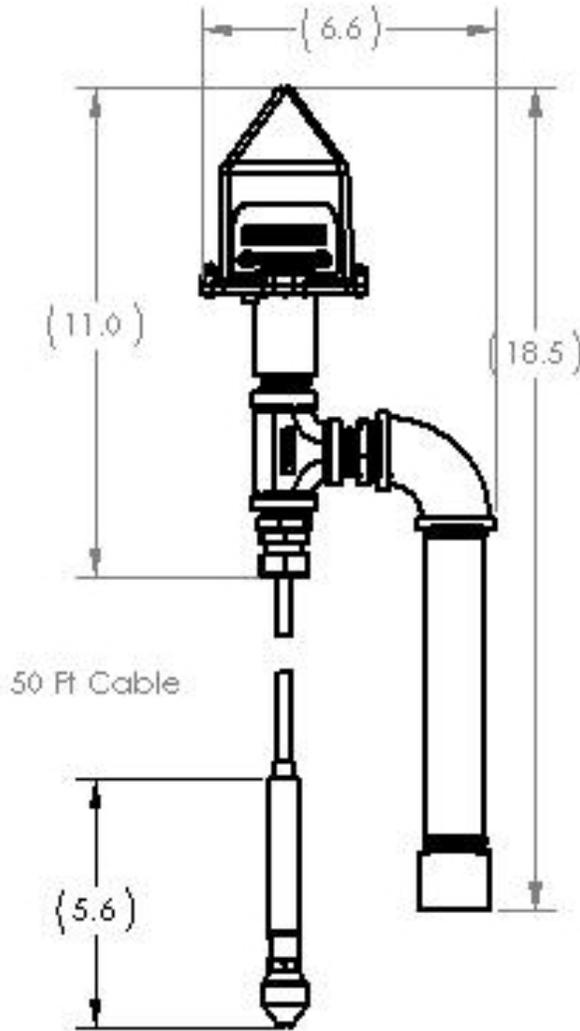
WI-SL-XX Dimensioned Mechanical Drawing
